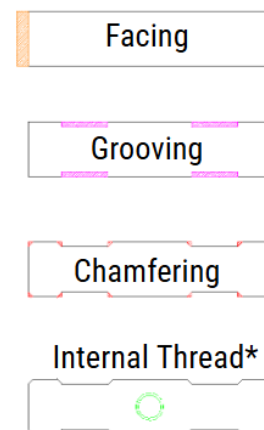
Breakdown of machining operations conducted on the hammer head workpiece.
